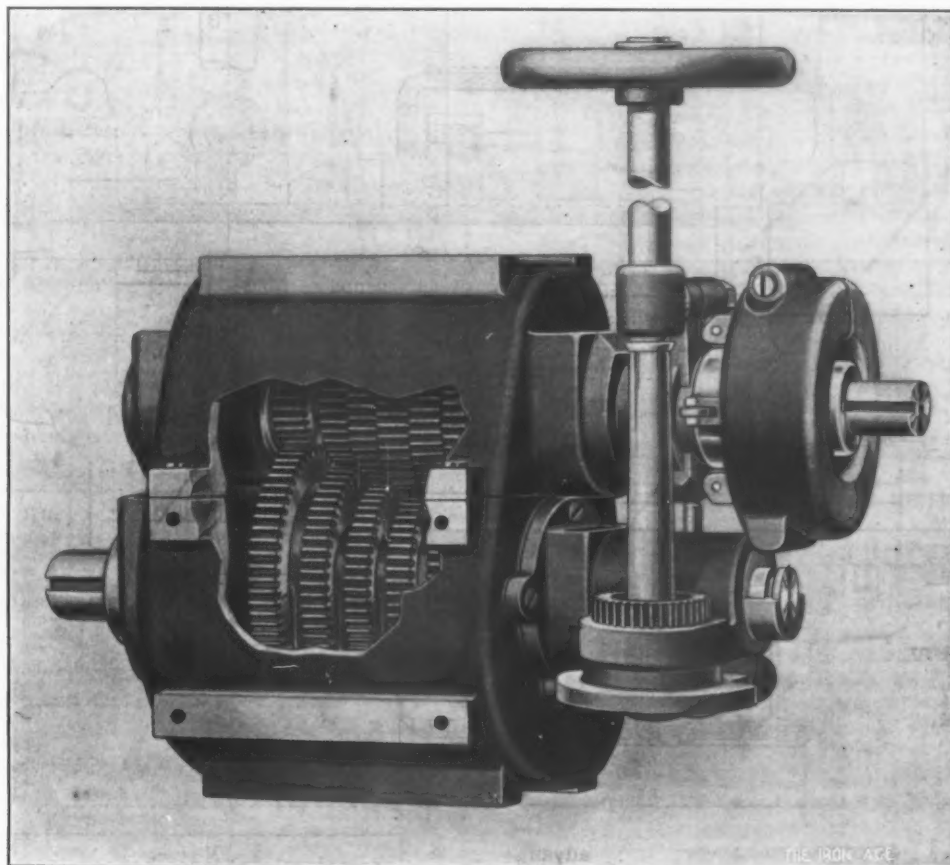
Perspective View, with Casing Broken to Show Gearing.
